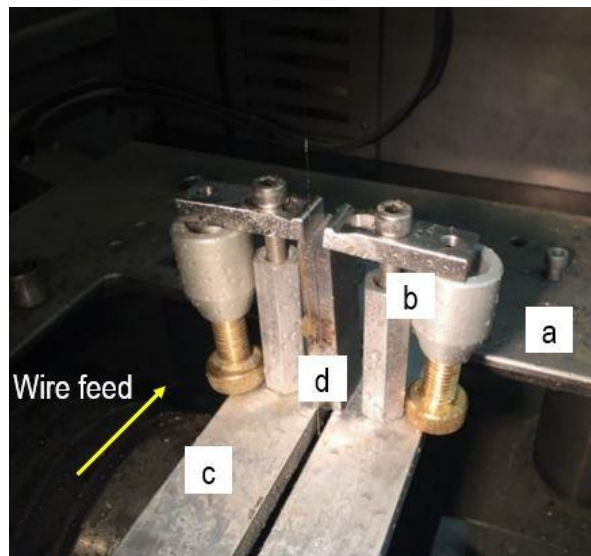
Section along Z direction. (a) EDM table, (b) Clamps, (c) Supporting beam, and (d) Welded workpieces
